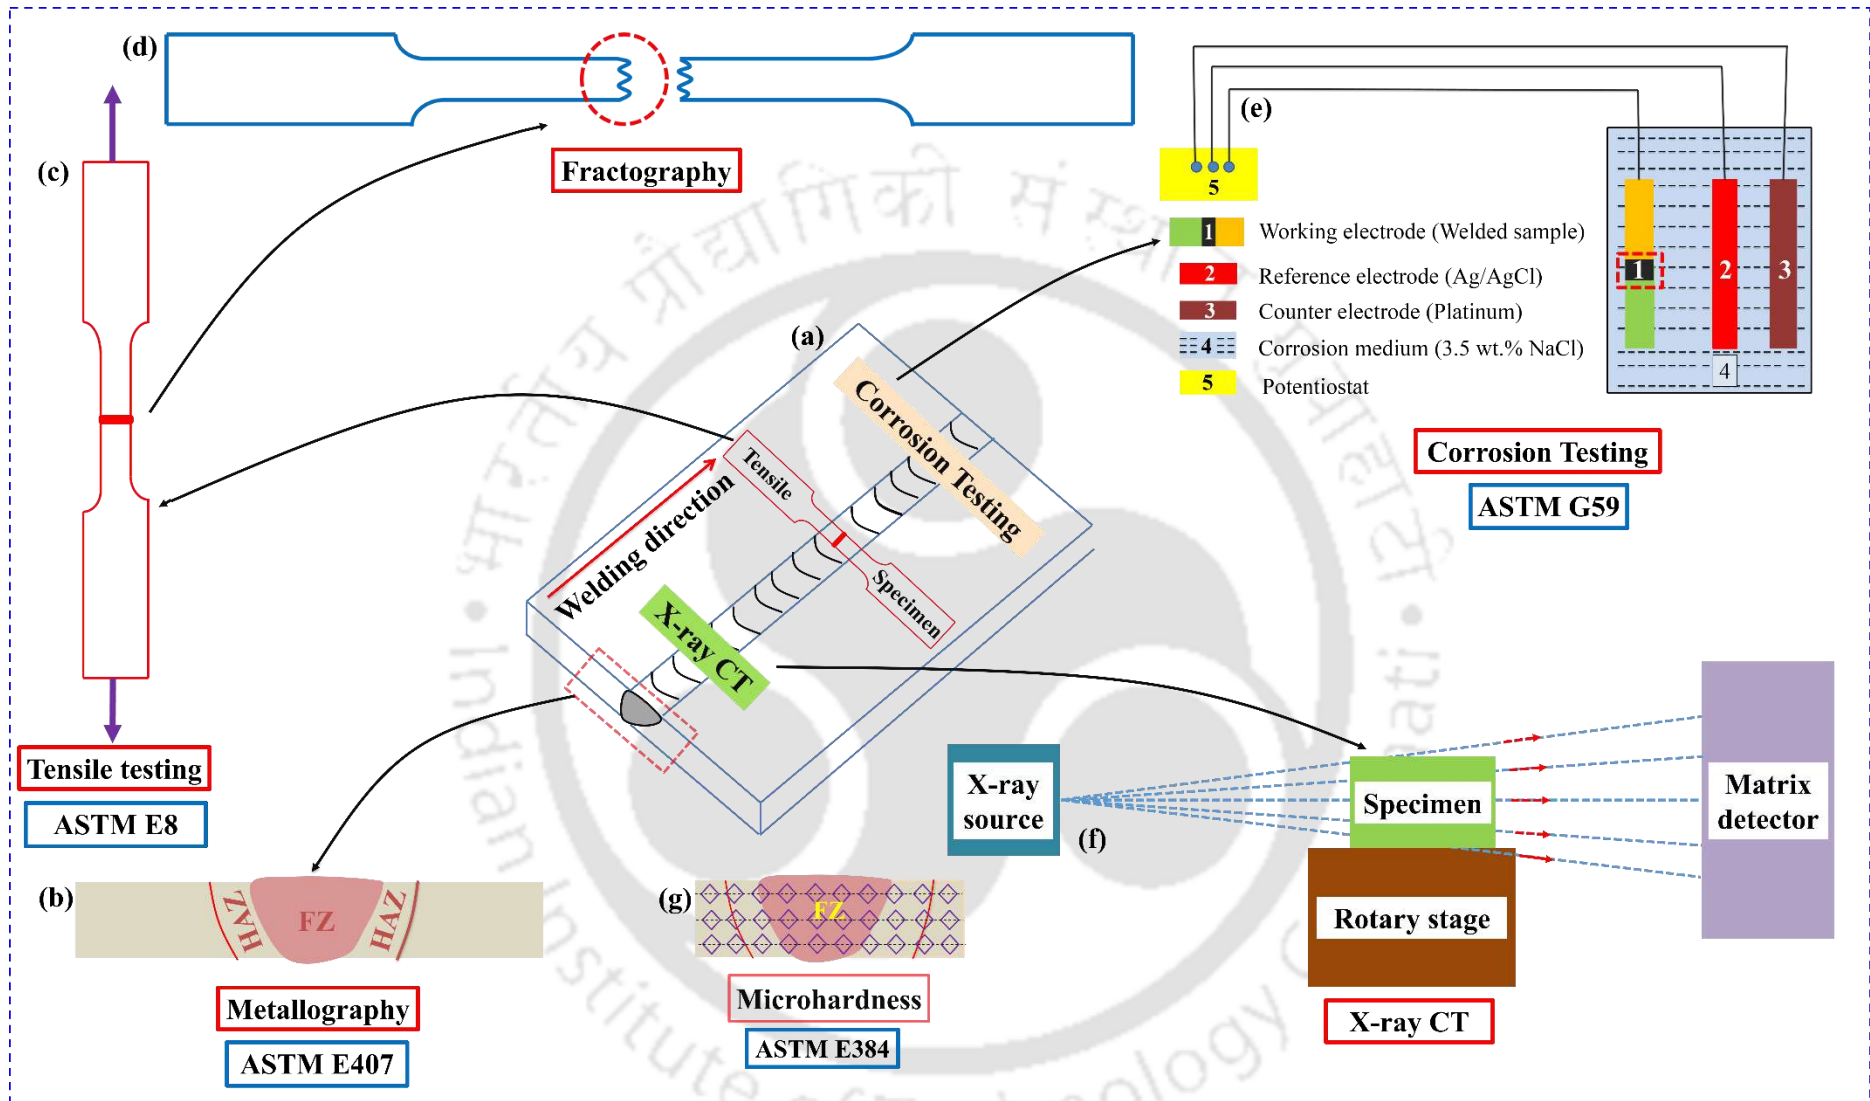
The different testing methods implemented to characterize the welded joints and the corresponding ASTM standards.
